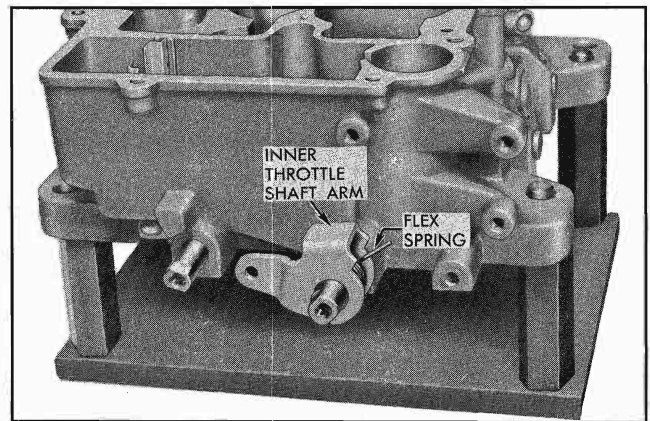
B-86 Inner Throttle Shaft Arm and Flex Spring Installed
